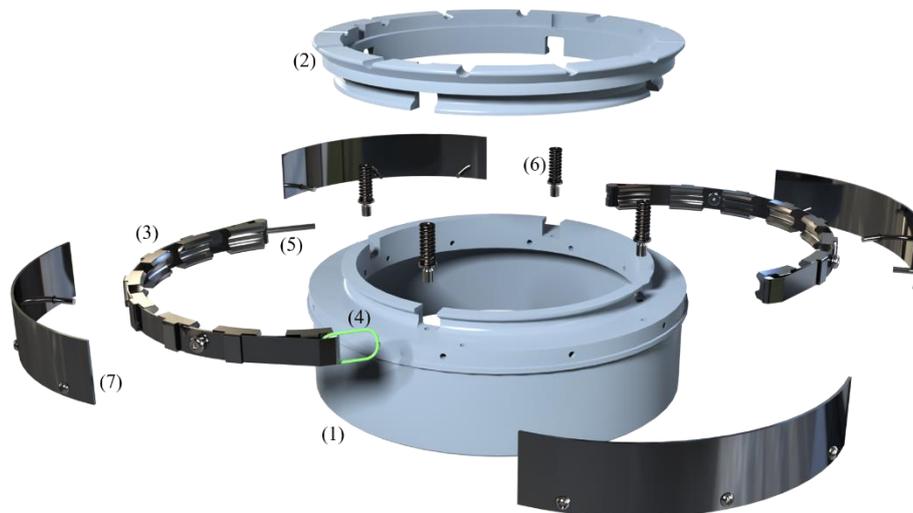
Exploded CAD render of the separation mechanism. (1) Lower ring, (2) Upper ring, (3) Clamp band half, (4) Dyneema loop of the burn wire release system, (5) Tensioning bolt, (6) Compression spring and guide, (7) Aero-cover.
